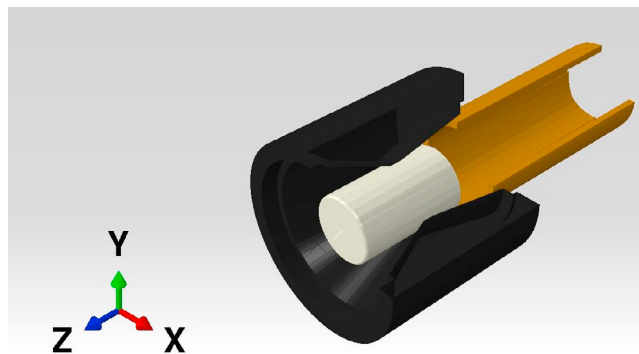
Assembly of 1st drawing step, showing tube, die and plug.
